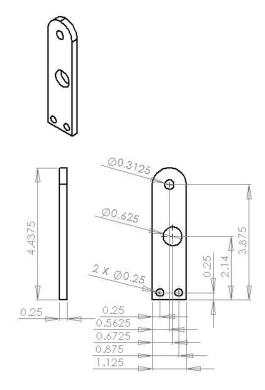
Wrist Joint Right Arm - Eng. Drawing
